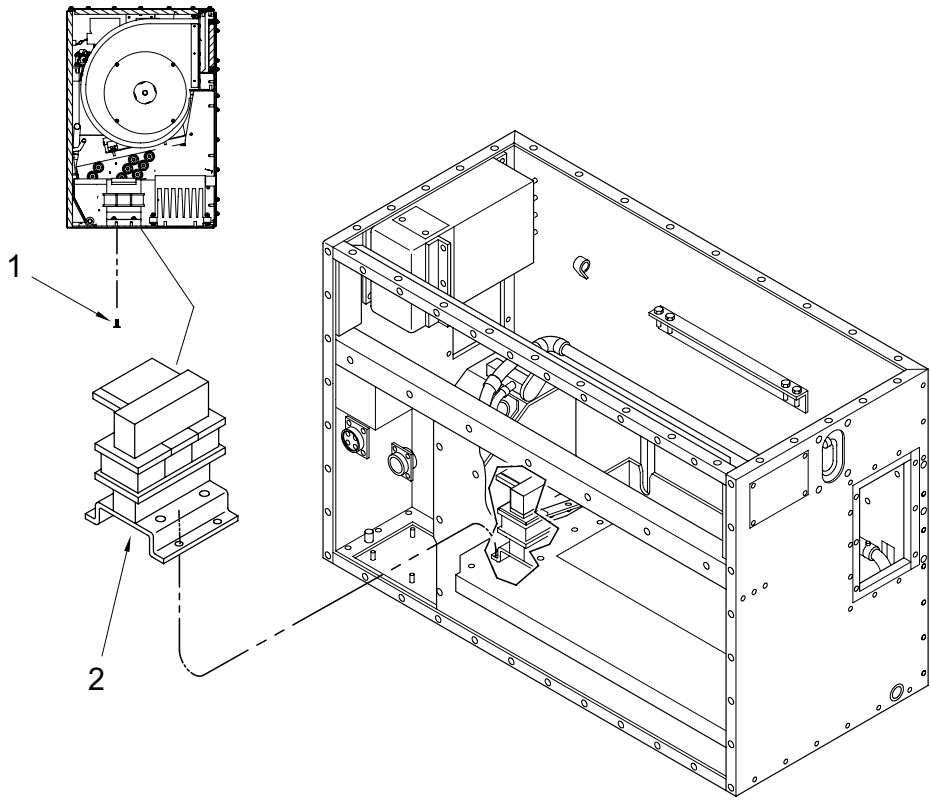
HARMONIC FILTER ASSEMBLY FL2.
